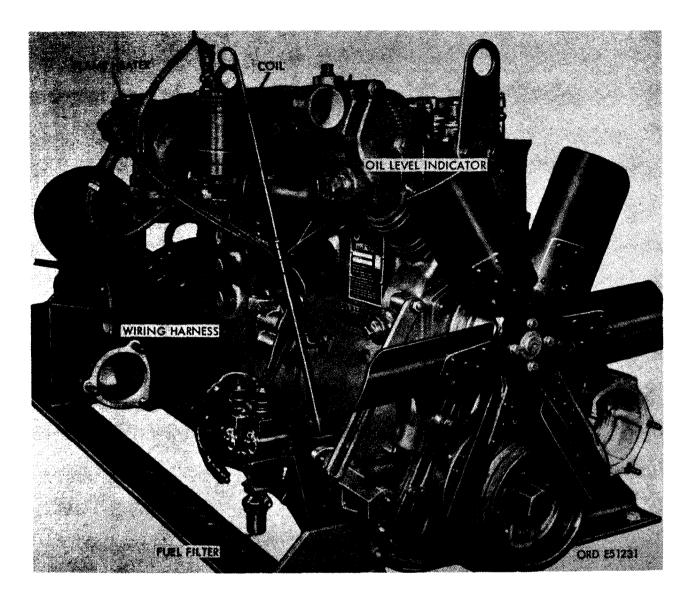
RIGHT FRONT VIEW OF ENGINE PARTIALLY ASSEMBLED.
